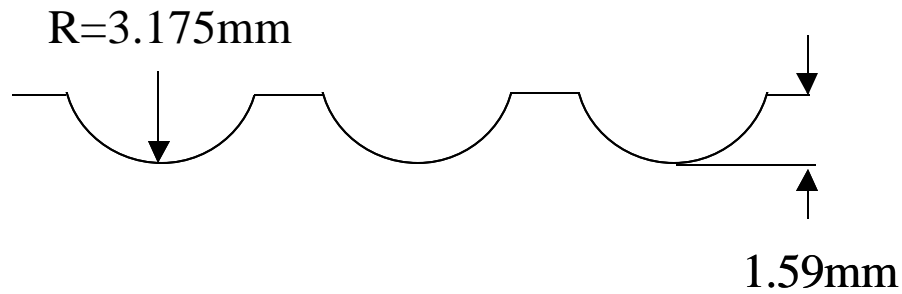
Chevron Plate Test Section Groove Geometry (Edge View)
